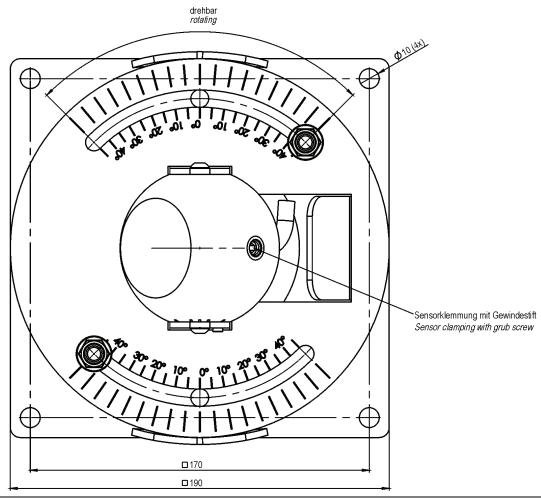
Dimensioned drawing ball sensor Type NOS0H0V500
